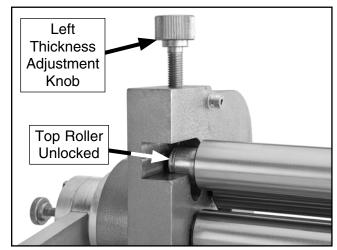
Thickness adjustment knob rotated to unlock top roller.
